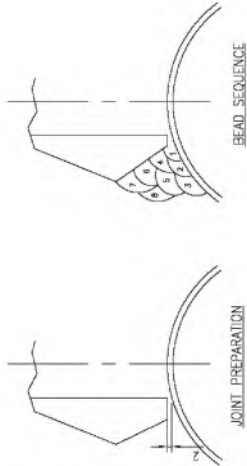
Dimension of fillet leg length to suit thickness of fitting
